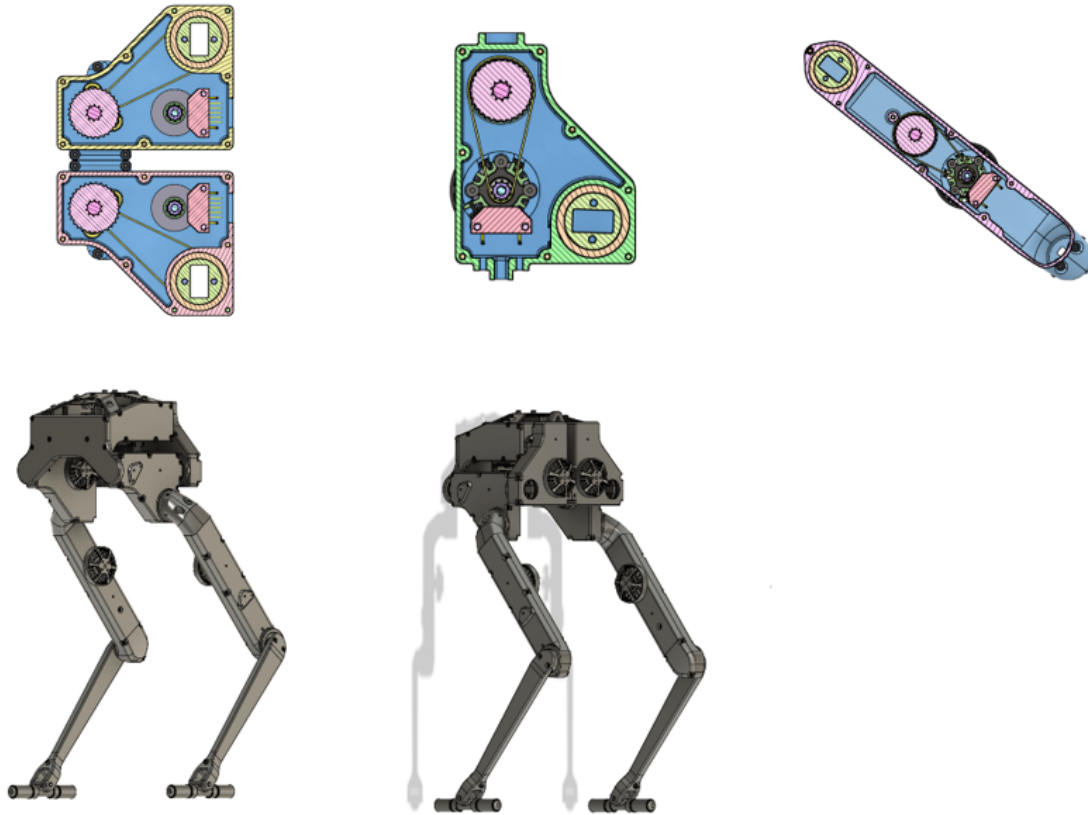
The Fusion CAD model and cross-sectional view of our bipedal robot.
